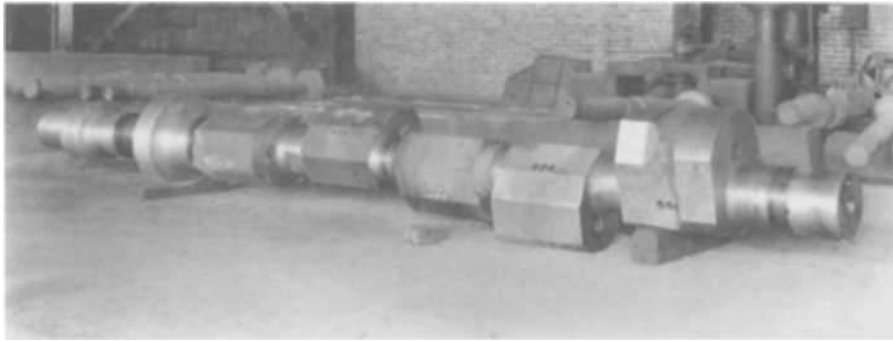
Crankpins after hot twisting, and drilled prior to sawing excess material from the crankpin locations.
